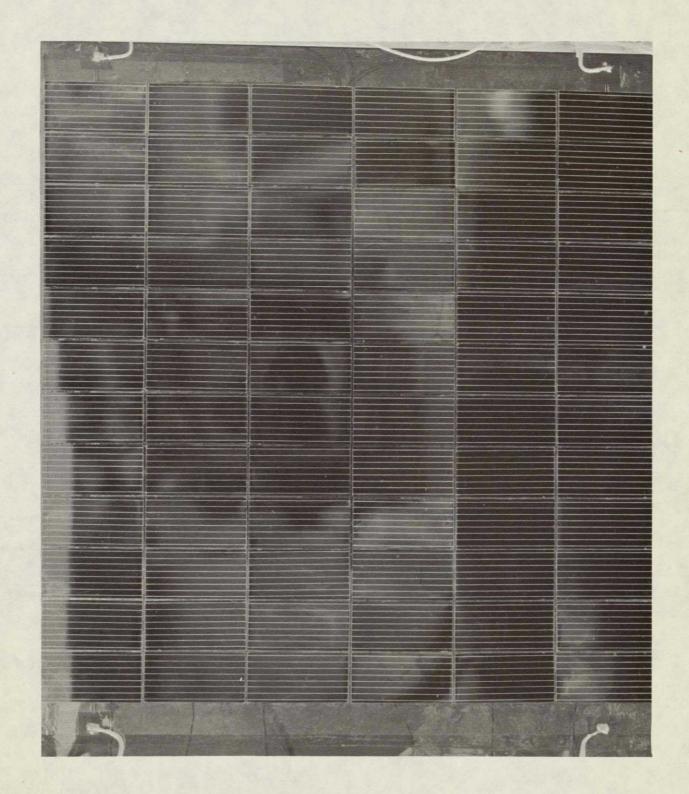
72-Cell Module No. 3, Thermocompression Bonded, Gold Plated Copper Interconnect, Front Side
